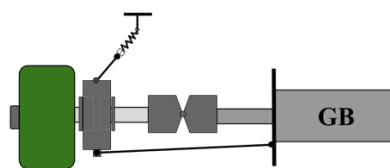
Conceptual drawing of the second suspension design. The gearbox is connected to the wheel shaft through the universal joint.
